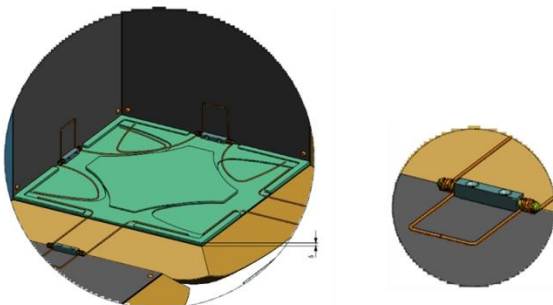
Spring system: (left) springs for shifting the fulcrum, (right) torsion spring for turning the panel
